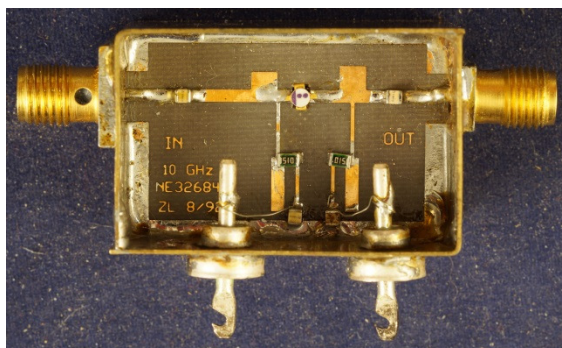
Amplifier assembly wrapping thin brass around PC board and soldering perimeter
